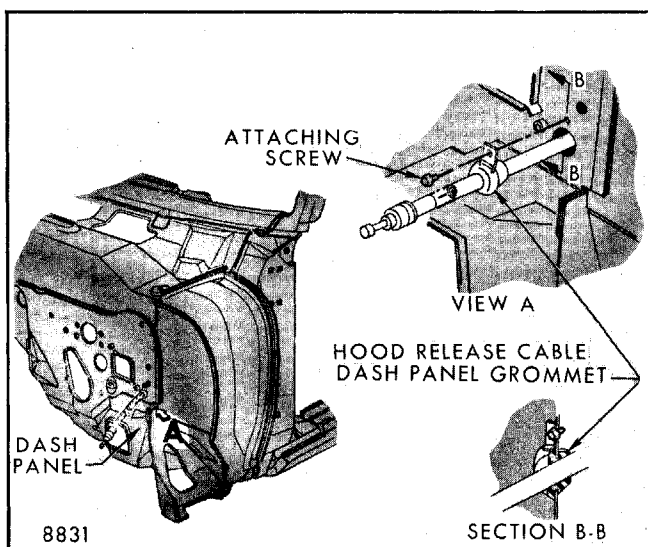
Hood Release Cable Dash Panel Grommet
